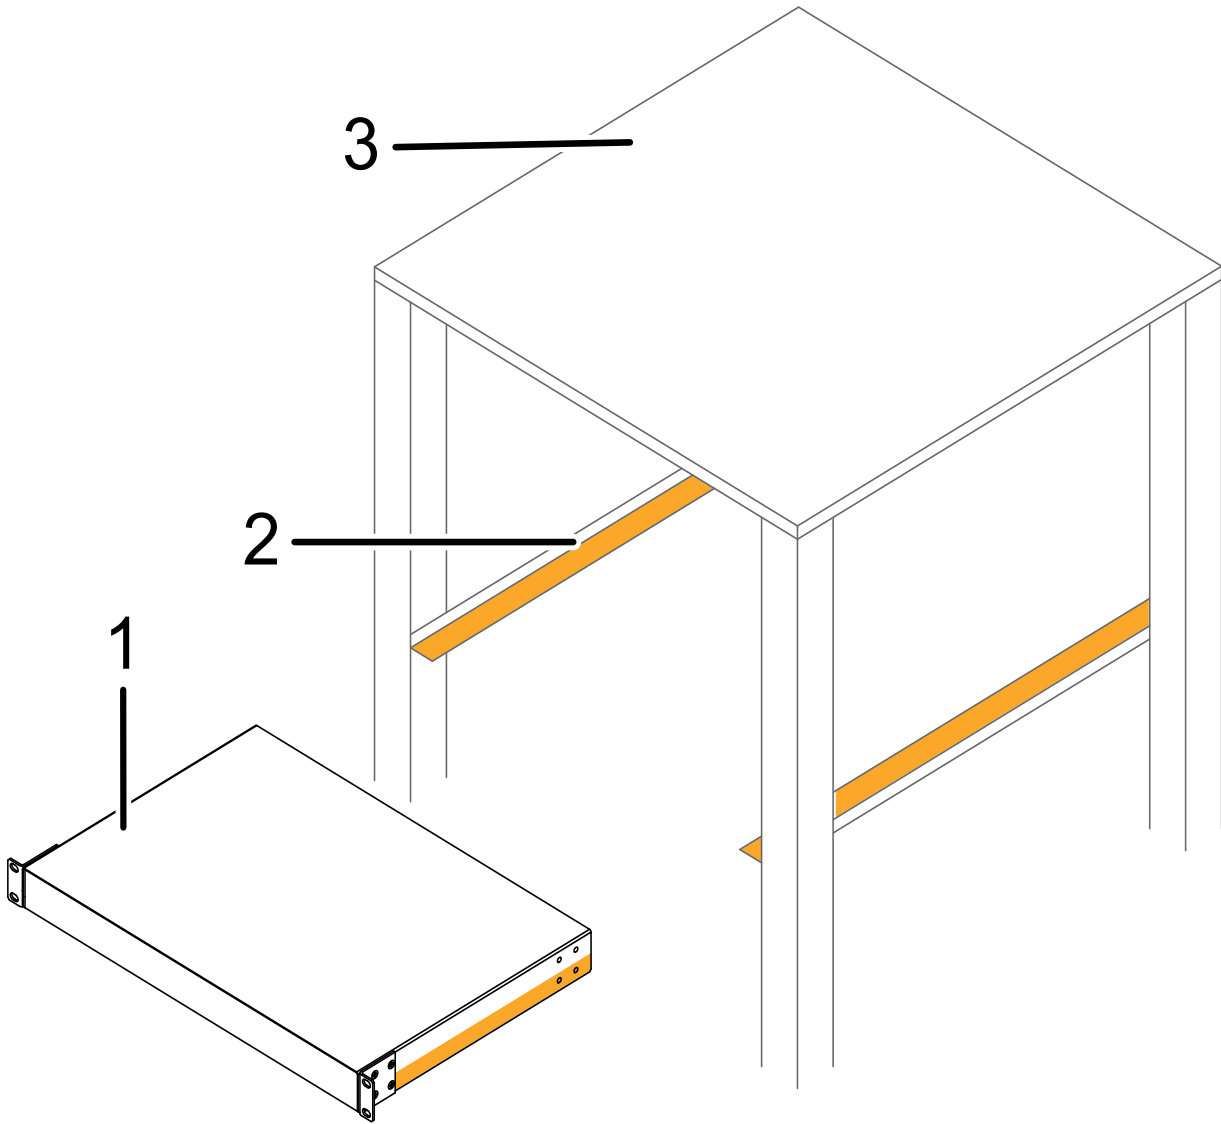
Assembly in a switch cabinet with sliding/mounting rails
